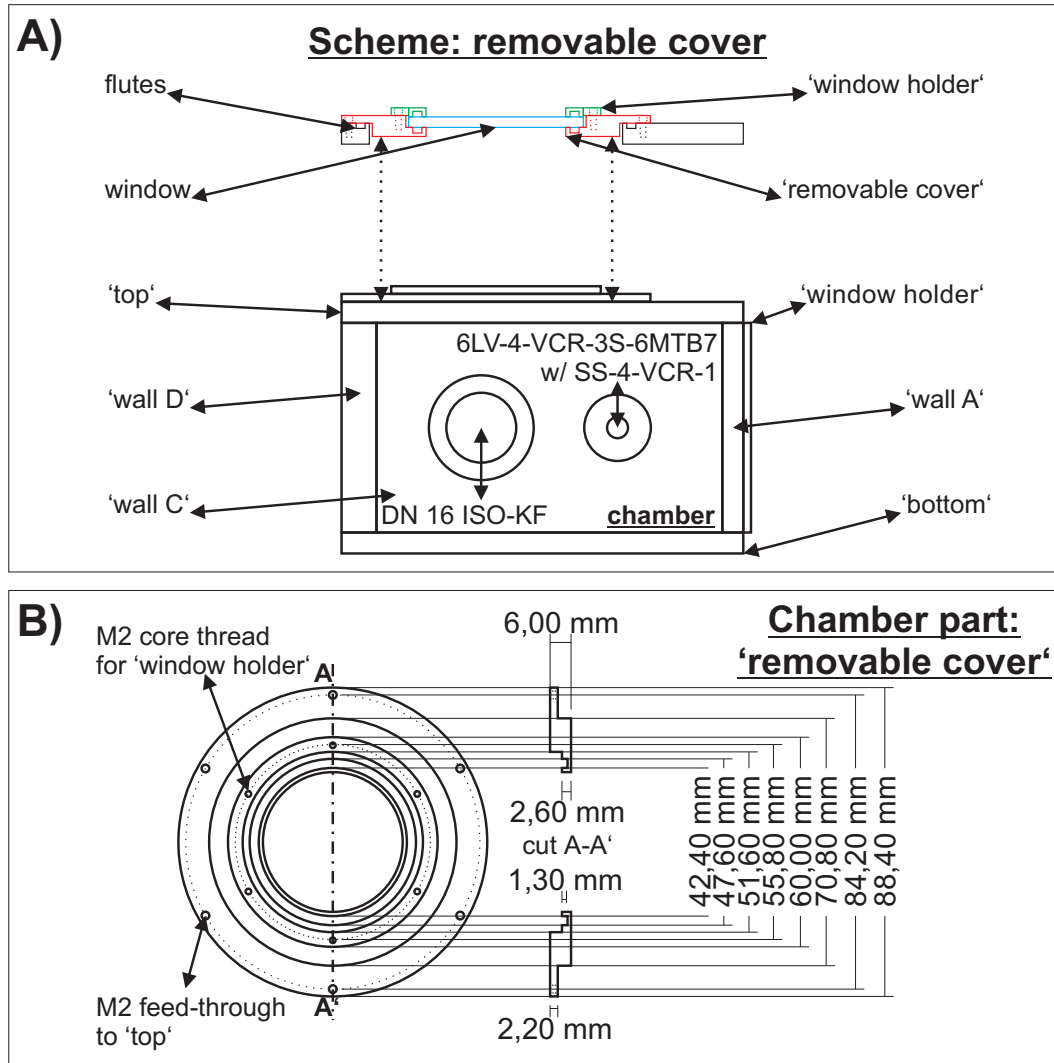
Schematic side view (A) and technical drawing (B) of the ‘removable cover’. The sample holder is extractable through an opening with 71 mm diameter when the cover is removed. An additional top view port provides accessibility for an IR-viewer.
